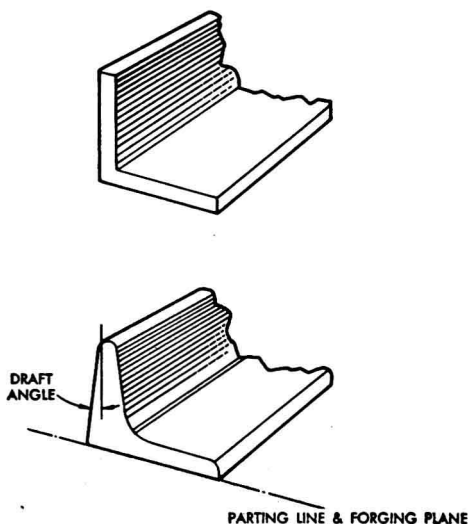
Draft required to permit removal of part from die; machined part is shown at top.
